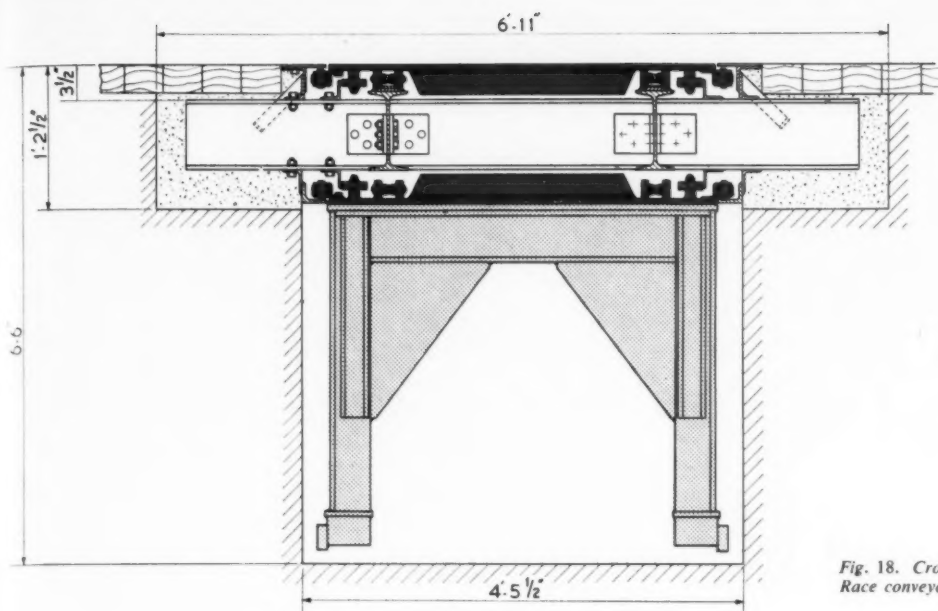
Cross-section of the Roll Race conveyor for tractor assembly
